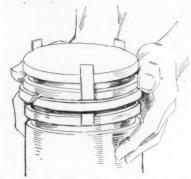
SLIPPING RING OVER PISTON ON SAW BLADES
